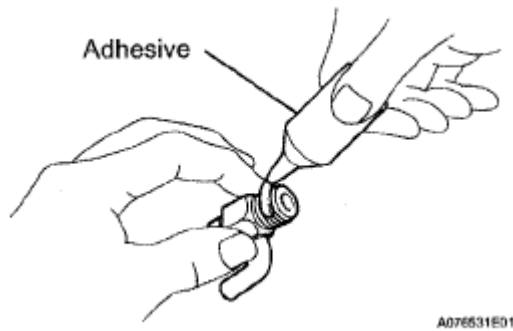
Locating Oil Filter Drain Plug To Oil Filter Cap
